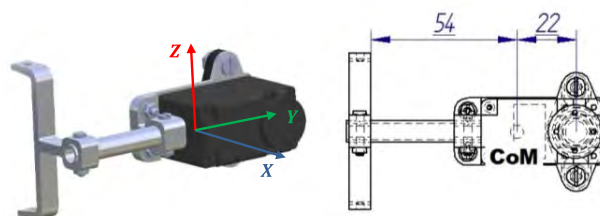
CoM and dimensions (in mm) of the shoulder roll structure.
